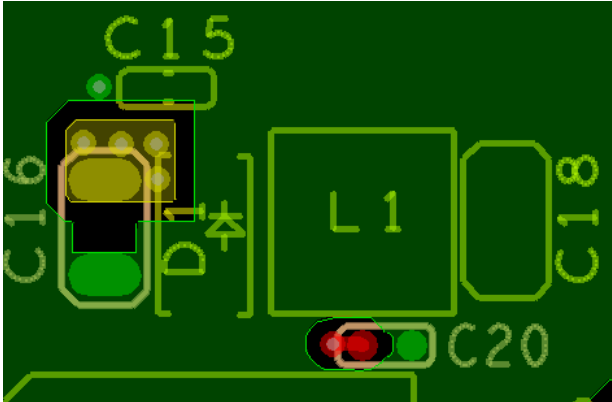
SWBST example layout. bottom layer components + top and bottom silkscreen
